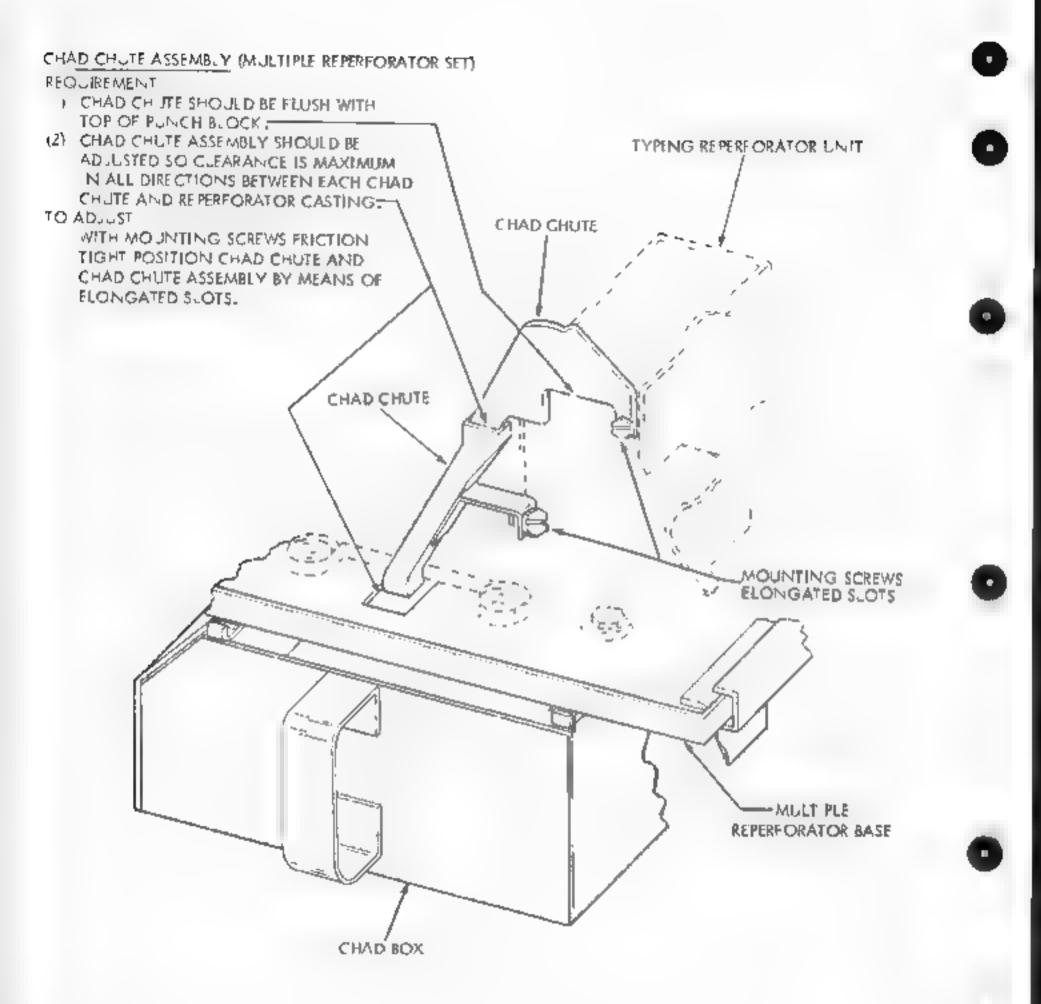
, CHAD CHUTE ASSEMBLY FOR MULTIPLE REPERFORATOR SET
